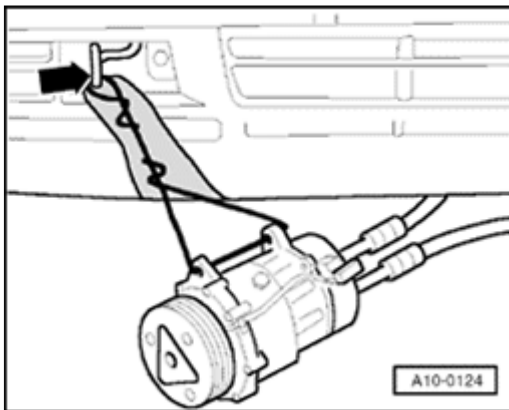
Identifying Air Conditioning Compressor Secured To Towing Eye
